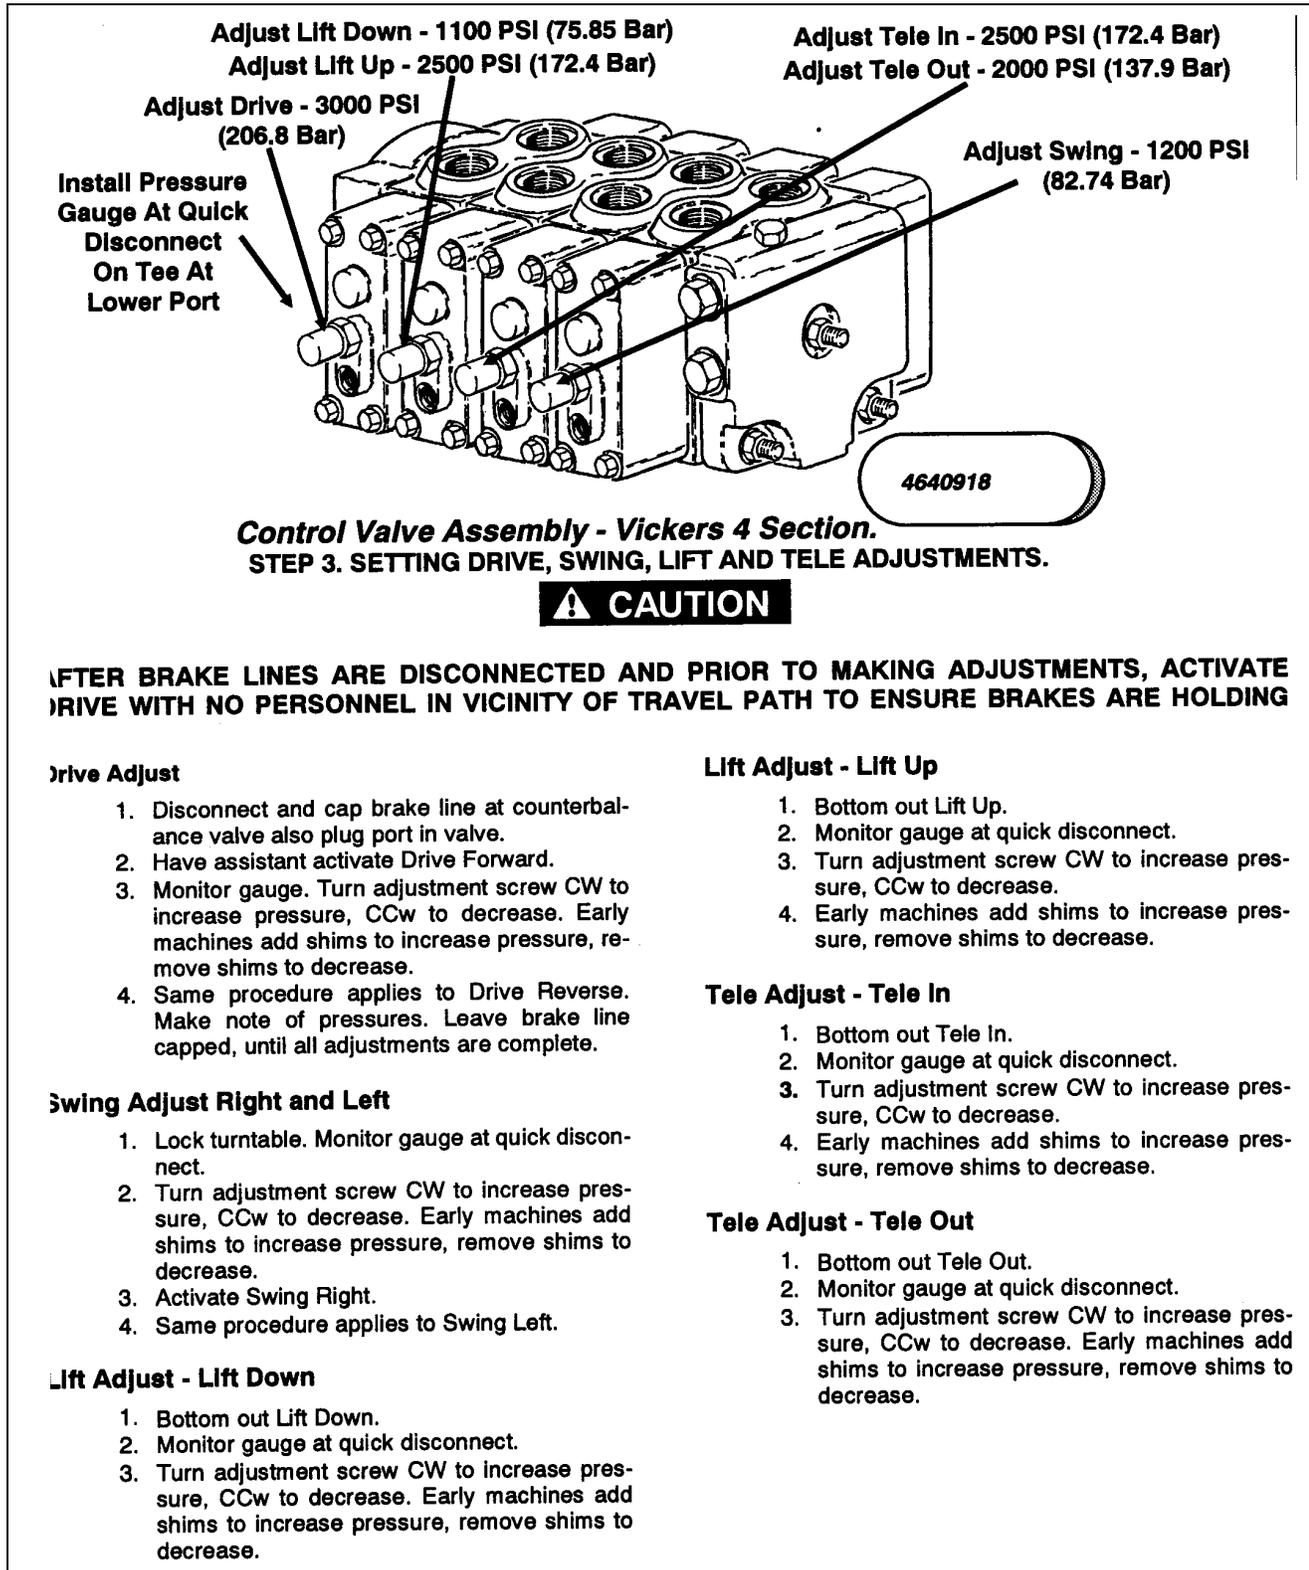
Vickers All Hydraulic Machines Pressure Settings (Sheet 2 of 4).
